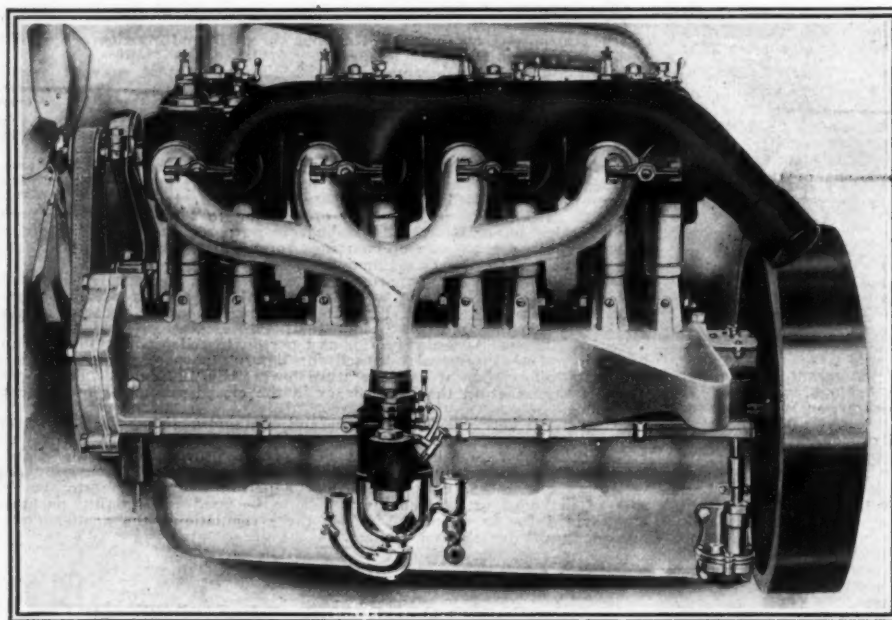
This is the motor used in the Overland chassis Model 6. The increased size of the water manifold for the thermo-syphon water circulation can be seen in the return water pipe. The circulating oil pump for the motor lubrication is placed at the left rear of the crankcase. Valve stems and springs are enclosed and special provisions made to prevent leaking of oil at the upper ends of the valve lifter rods
